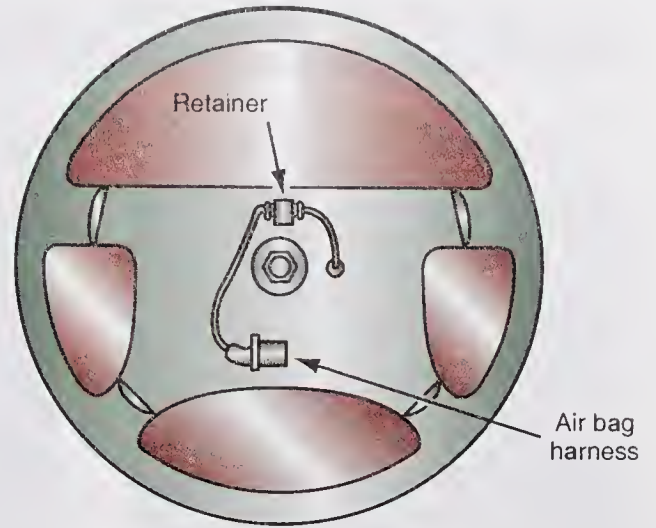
Disconnecting the air bag wiring retainer.
